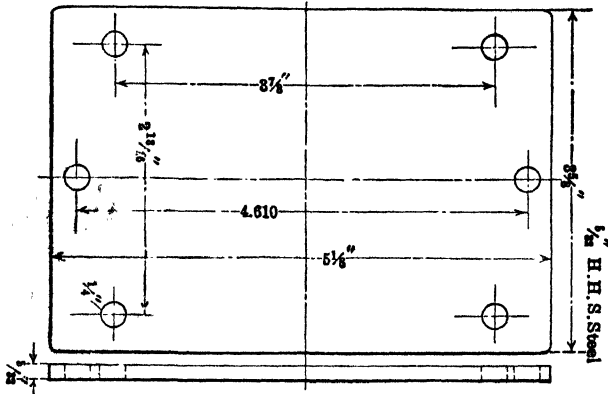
The plate as pierced with the tools in Fig. 127.
